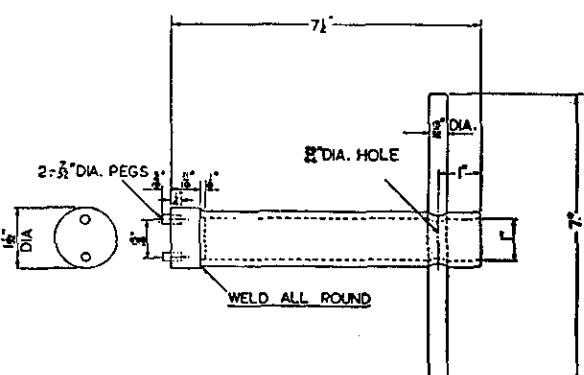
View showing dimensions of special tool used to remove relief valve seat of the control valve shown in Fig. 138.
